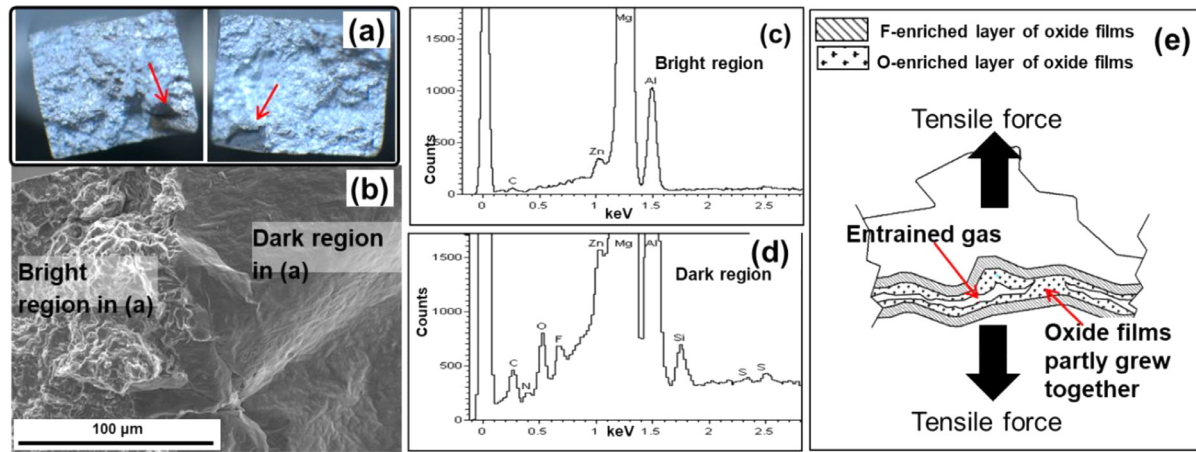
(a) A pair of the fracture surfaces of a AZ91 alloy tensile test bar produced under a cover gas of SF_6 /air. The dimension of the fracture surface is $5\text{ mm} \times 6\text{ mm}$, (b) a section of the boundary between the dark and bright regions shown in (a), (c-d) EDS spectrum of the (c) bright regions and (d) dark regions, (e) schematic of an entrainment defect contained in a test bar.
